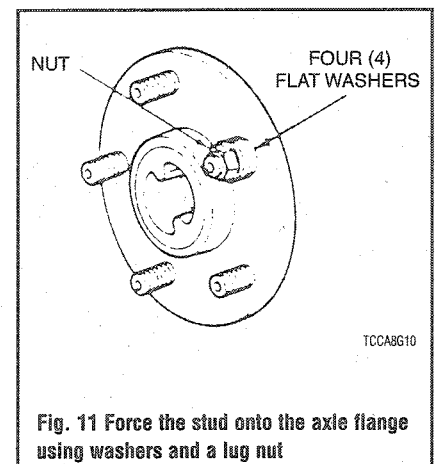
Force the stud onto the axle flange using washers and a lug nut
